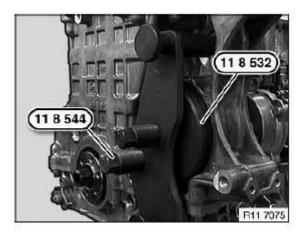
Identifying Special Tool (11 8 544) & (11 8 532) Courtesy of BMW OF NORTH AMERICA, INC.
